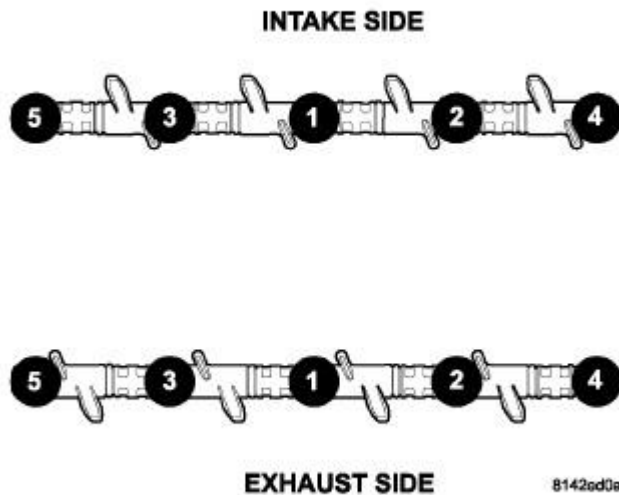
ROCKER SHAFT TORQUE SEQUENCE
